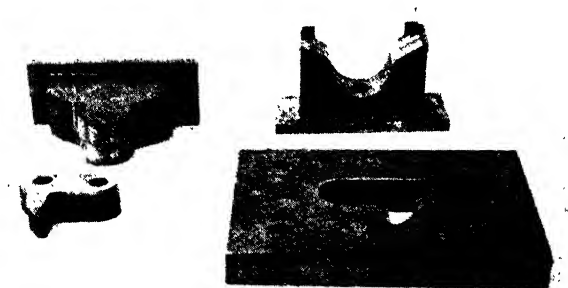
Jig and fixture or tool- and diemaking departments have a wide variety of problems, one of which is illustrated by the hard surfacing of the cutting edges of the blanking die in the foreground, a job normally done with direct-current welding equipment. (*Courtesy of R. G. LeTourneau, Inc.*)
